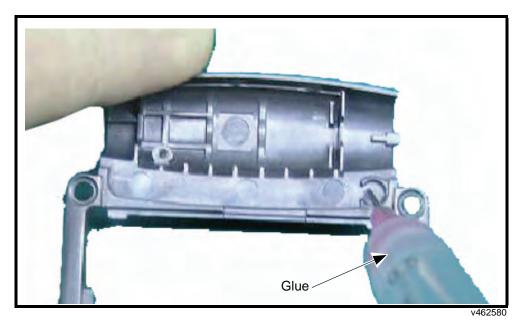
Installing Magnet Glue to the Flip Inner Assembly
